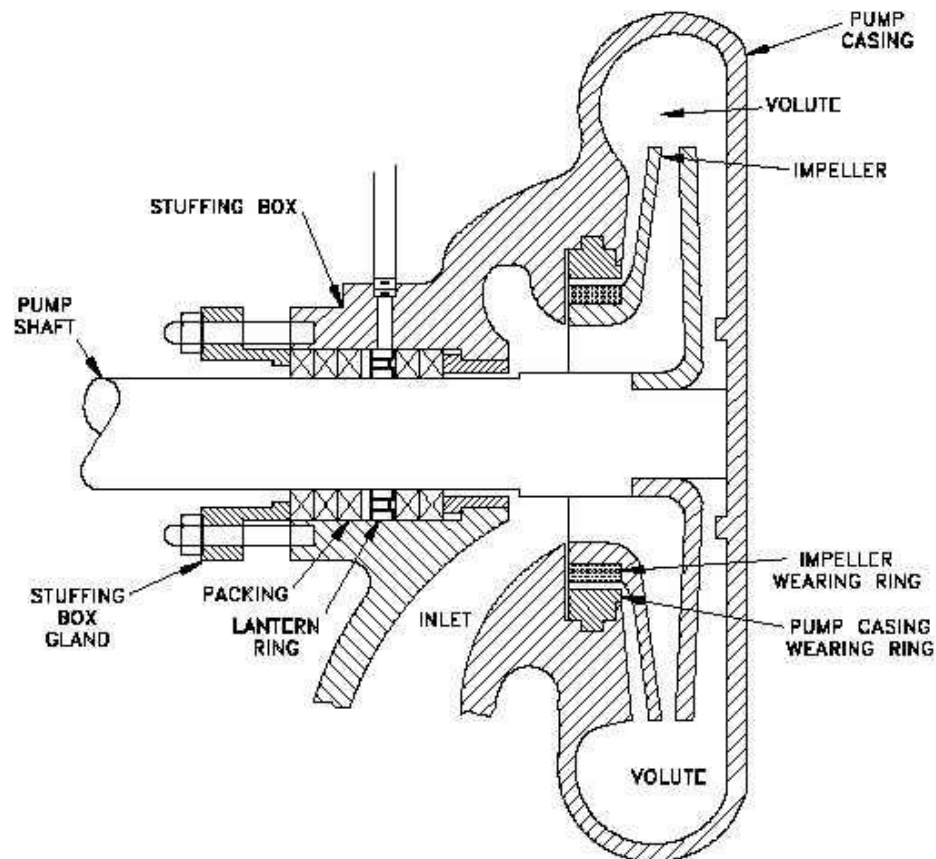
Cross-section of Single Stage Centrifugal Pump
